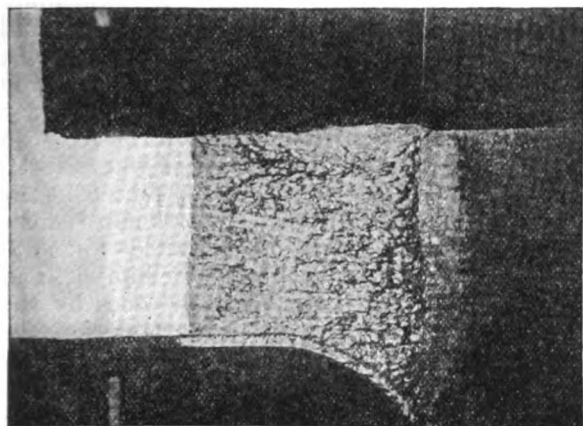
B. AFTER. The Completed Weld. A piece of boiler plate is placed around the bottom of the gas as shown in the illustration, in order to hold the new metal in place
